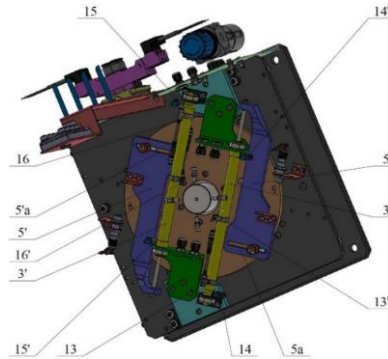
Top view, in perspective, of the handling system, highlighting the elements of the lower subassembly
